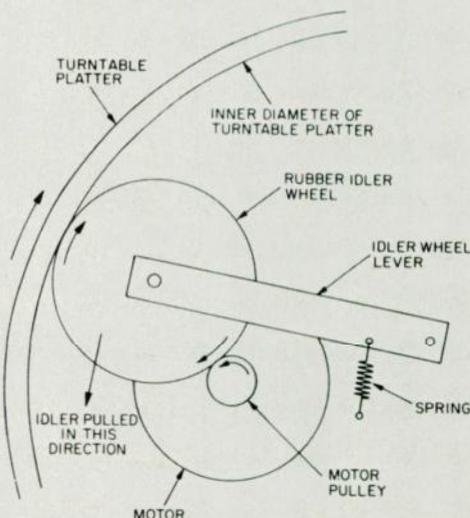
This variation of the lever system jams the idler wheel between the motor pulley and the platter rim.
